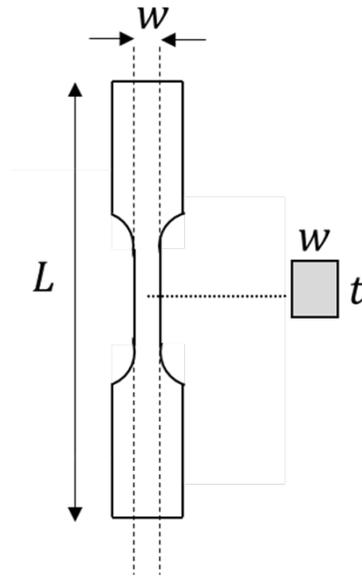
Tensile specimen geometry, where L is length, w is gage section width, and t is thickness
